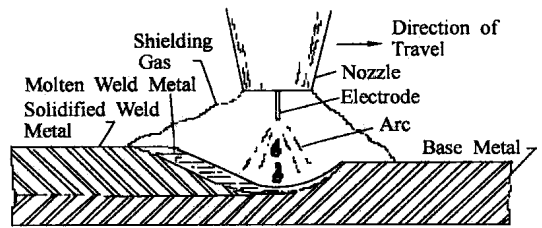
Gas metal arc welding. Shielding of arc and weldpool is provided by the gas. The electrode is thin wire.
